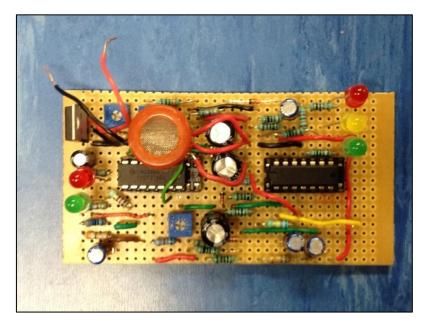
Breath Alcohol Indicator Vero board Final Design.
